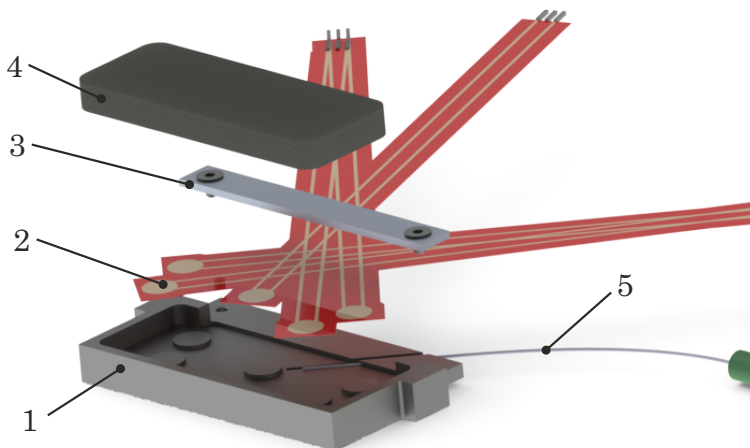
Embedded brake pad sensor: 1) backplate, 2) FlexiForce™ HT201 force sensor, 3) sensor holder, 4) friction material (lining) plug, 5) thermocouple.
